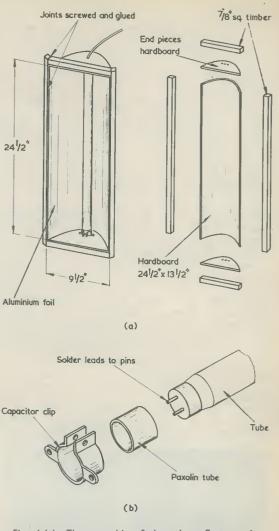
(a). The assembly of the tube reflector unit (b). Detail showing the method of securing the tube at each end
